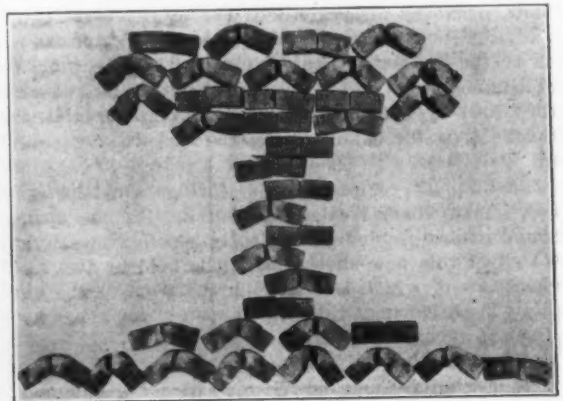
The Pieces of Rail Tested by the Fremont Method.
